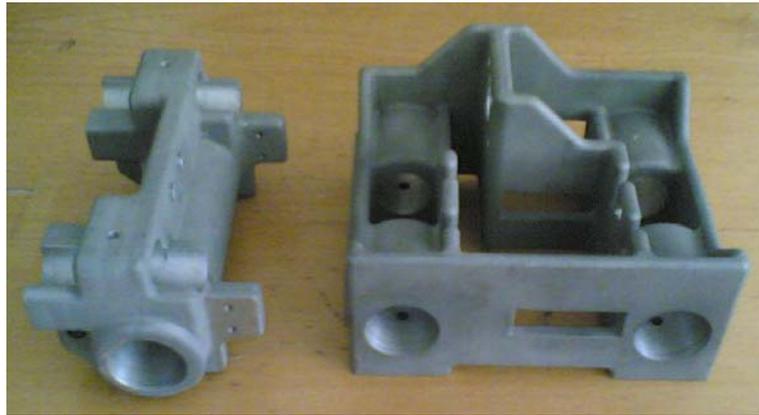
Aluminum Cast Parts: Main Axis Carriage (Left) and Head Axis Carriage (Right)
